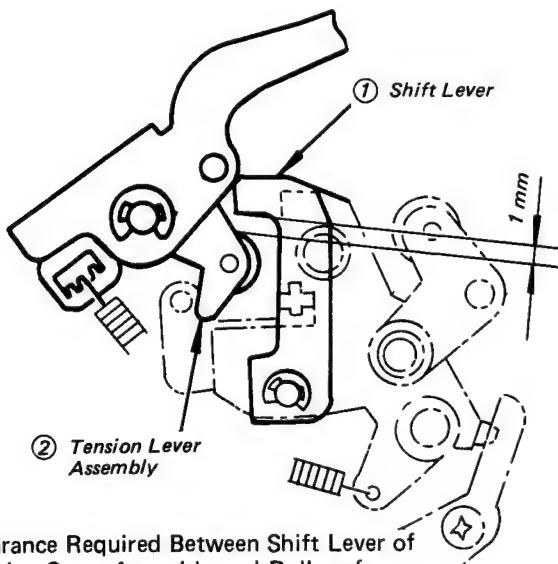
Clearance Required Between Shift Lever of Tension Servo Assembly and Roller of Tension Lever Assembly
